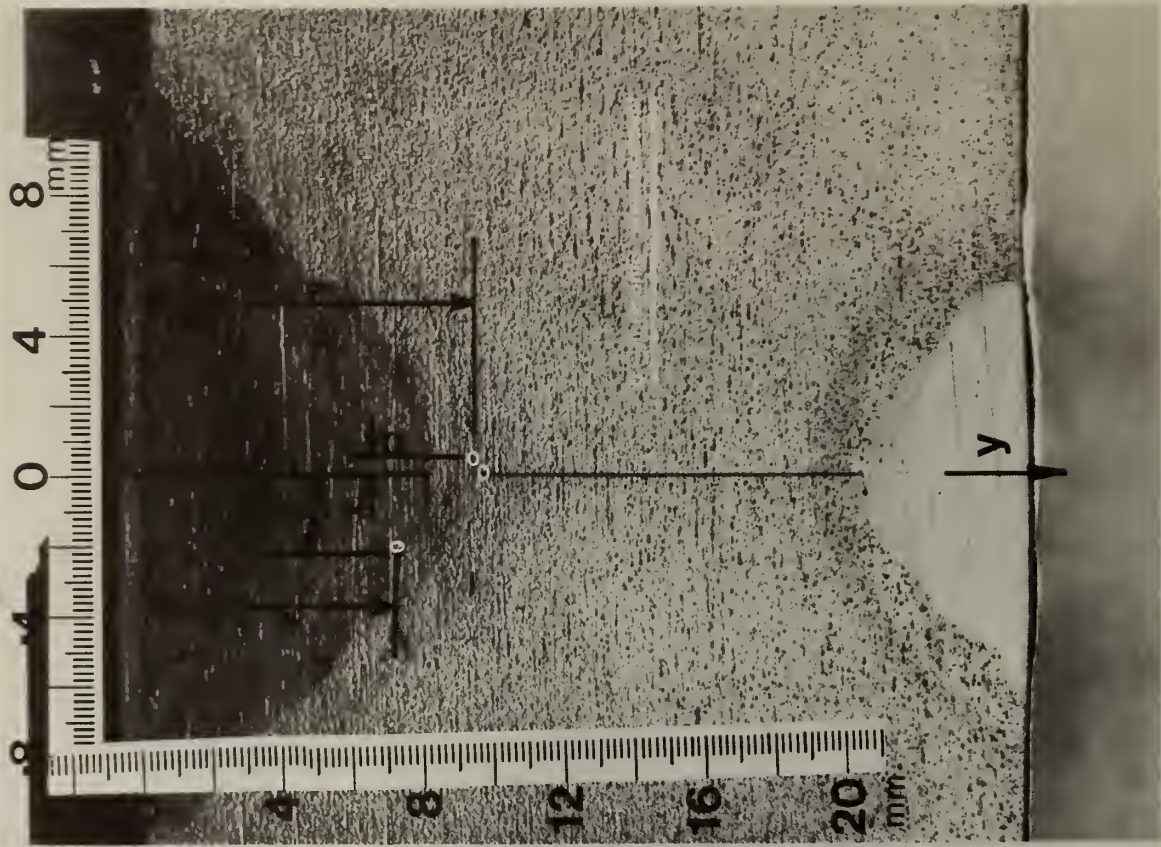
Cross Section of As Welded Specimens With Normal and 45° Inwelded Cracks
